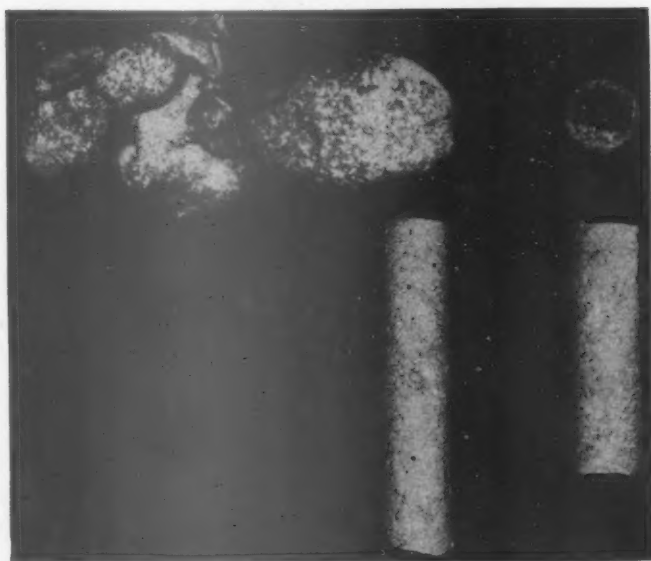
TOP AND SIDE VIEWS OF TWO CASTINGS FROM DRY SAND MOLDS.
